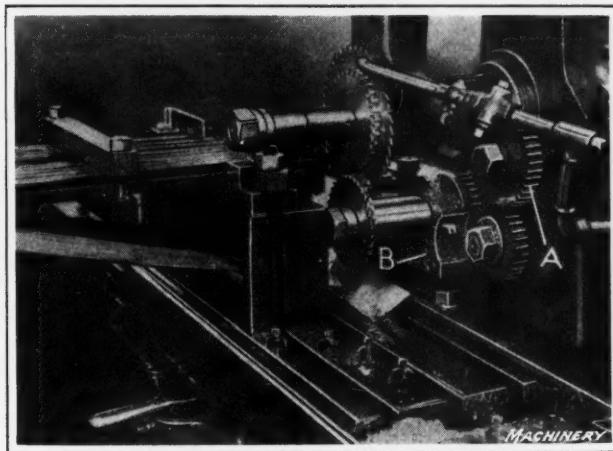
Special Attachment used in milling Spacers for Steam Turbine Disk Blades
